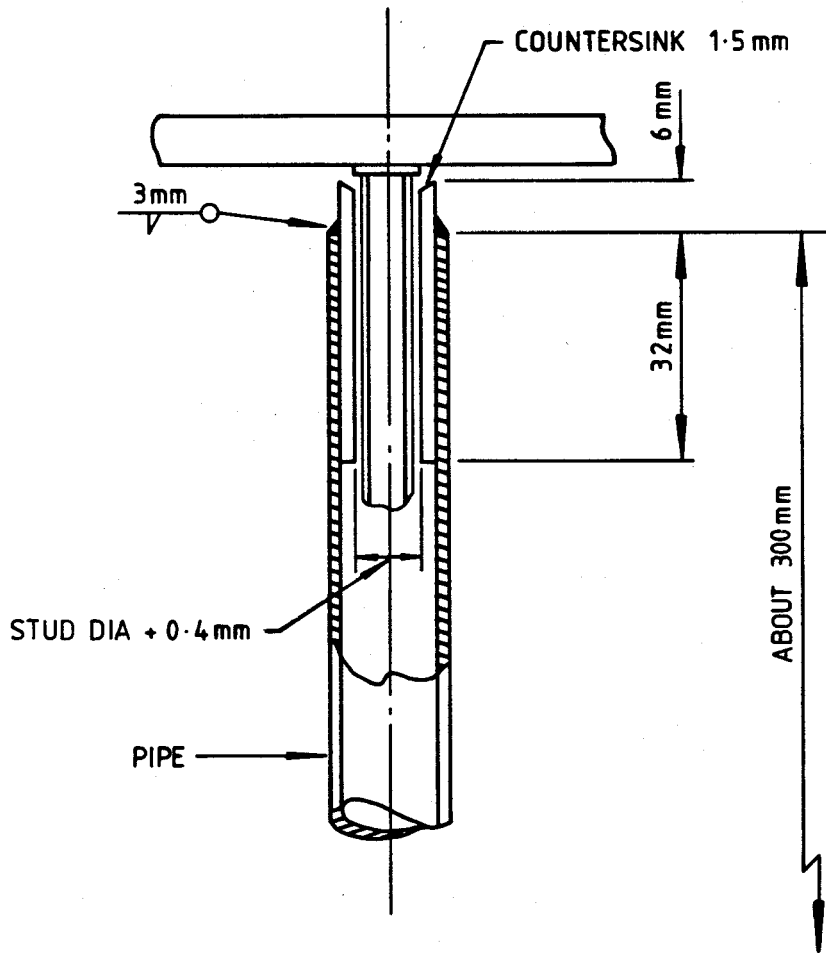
DEVICE FOR TESTING WELDED STUDS
